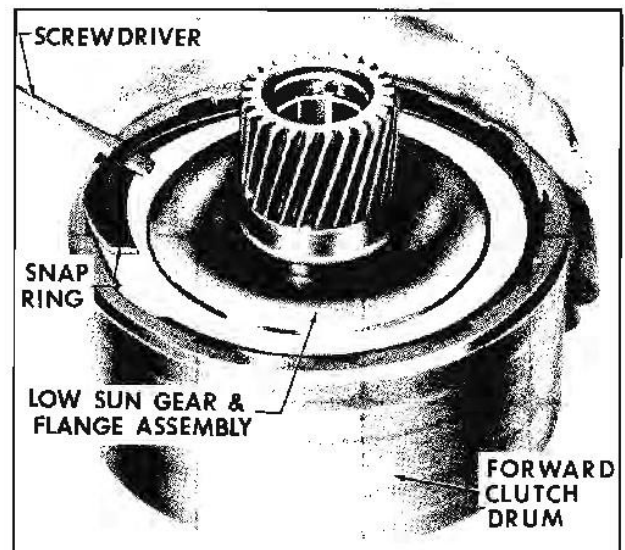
B-70 Removing Low Sun Gear and Flange Assembly Snap Ring
